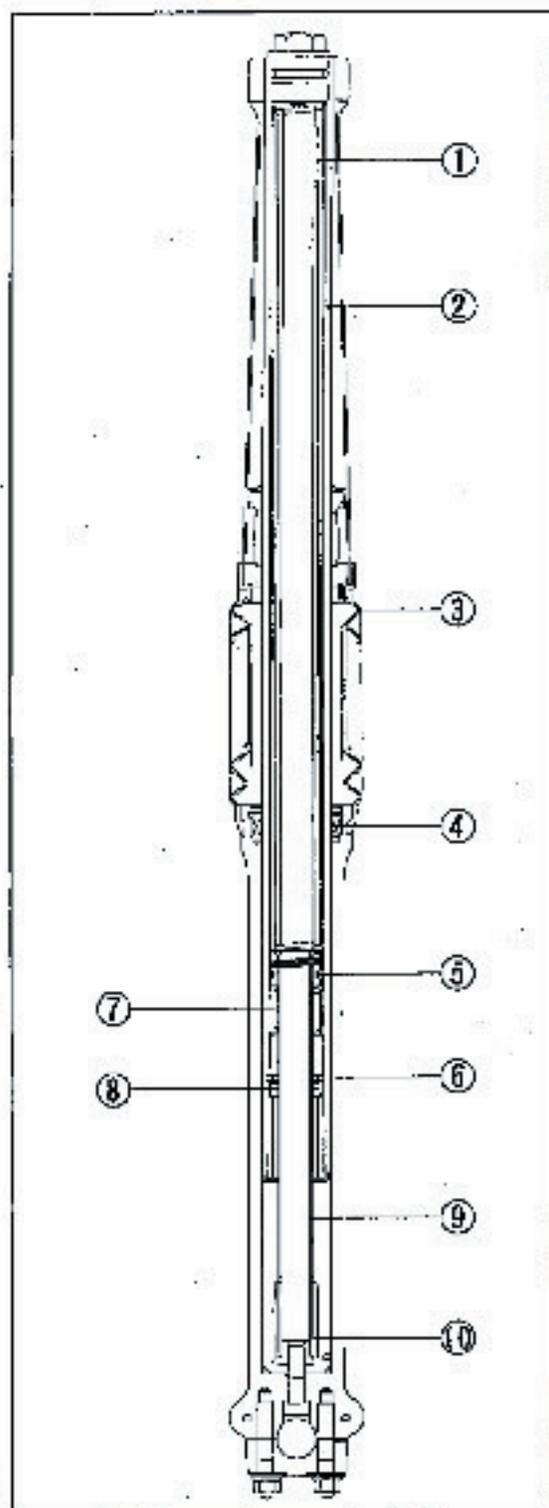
① Front spring ② Front fork pipe ③ Front rebound spring ④ Free valve ⑤ Bottom pipe ⑥ Oil lock piece ⑦ Front fork dust seal ⑧ Oil seal ⑨ Piston ring ⑩ Front fork bottom leg
